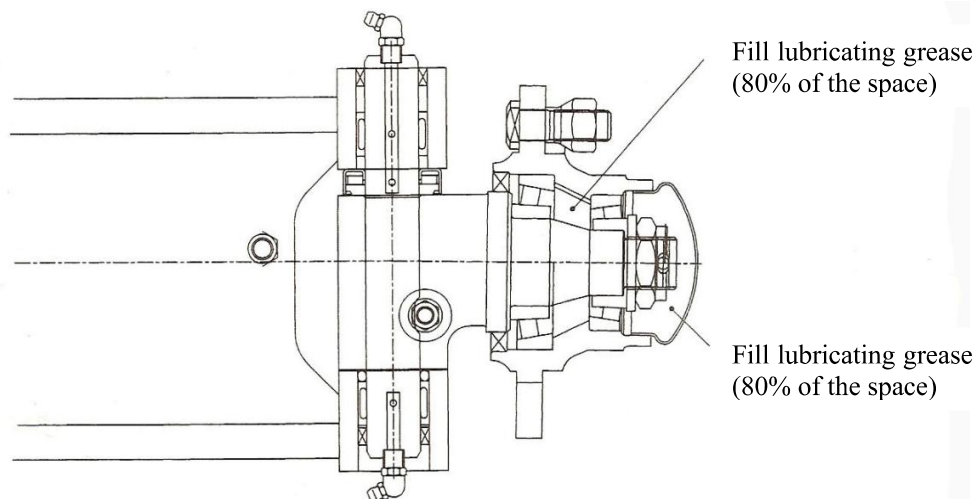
Fill lubricating grease and pre-load adjustment
